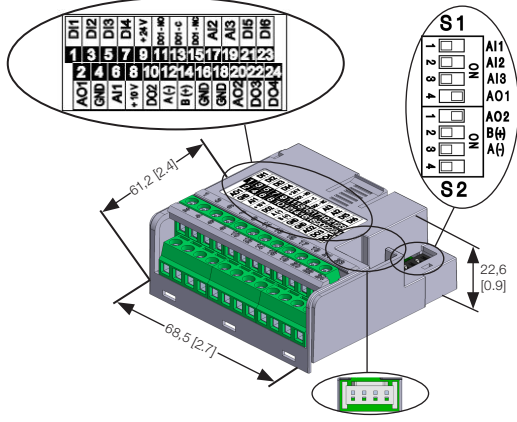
CFW500-IOAD dimensions in mm [in]. DIP-switches location and CFW500-MMF connector
